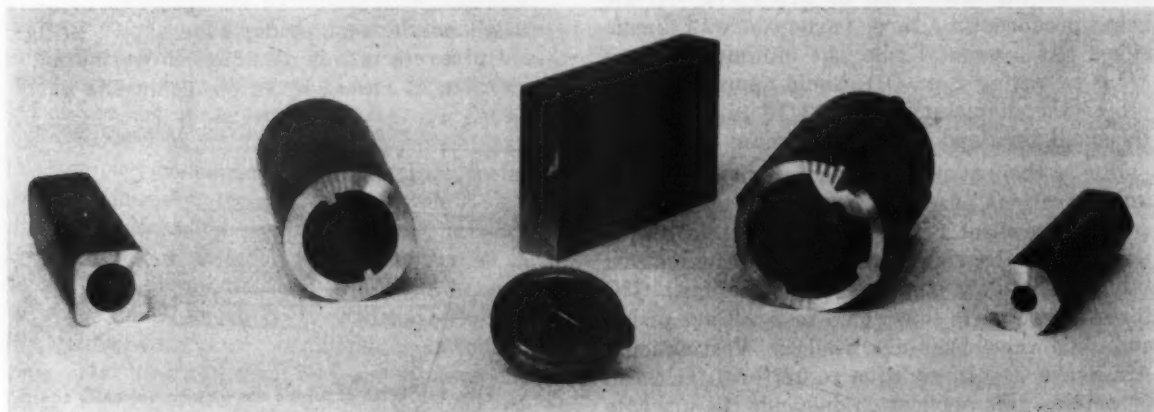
A few examples of special shapes which may be continuously cast. Ability to machine the necessary contours into the dies is controlling factor in shapes which can be successfully cast.
